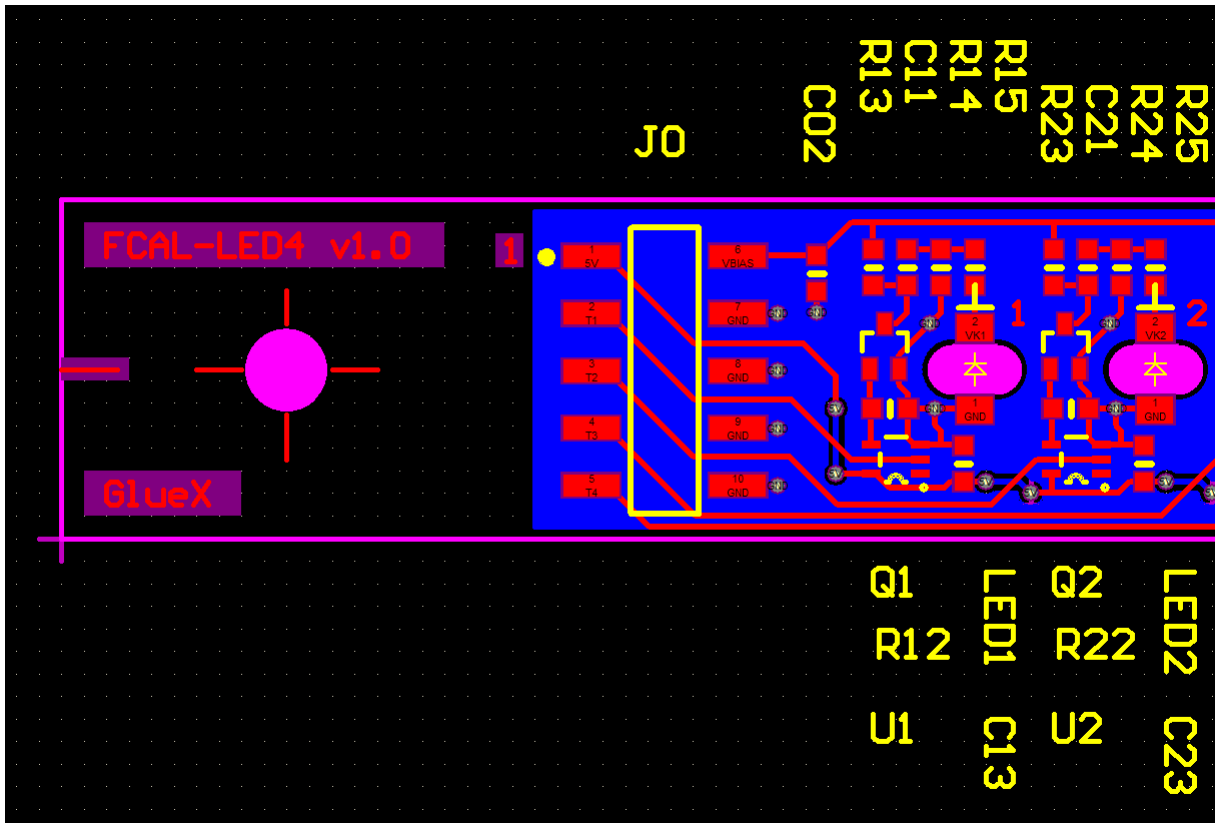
FCAL-LED4 PCB detail, showing connector J0 pin assignments.
